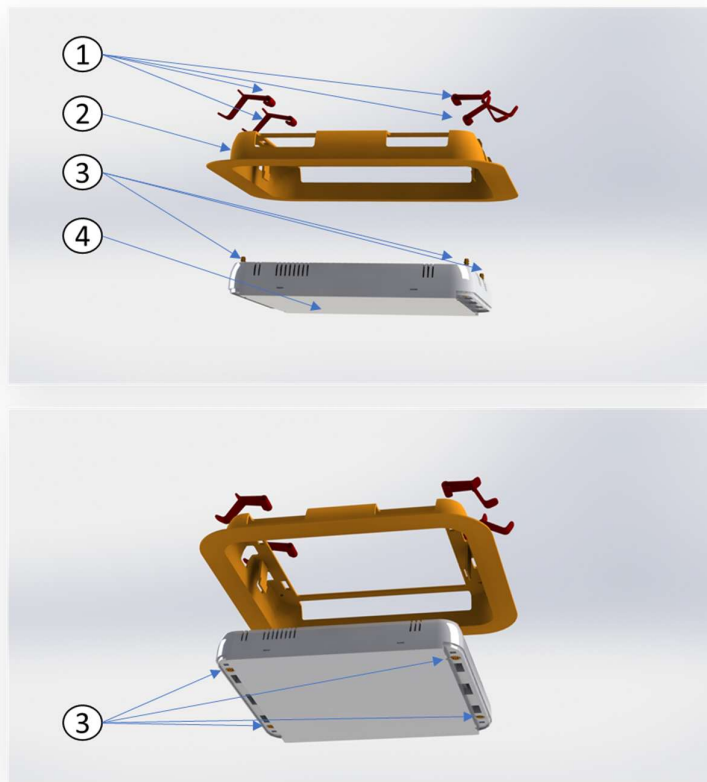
Above the ceiling (drywall or drop ceiling) installation concept
